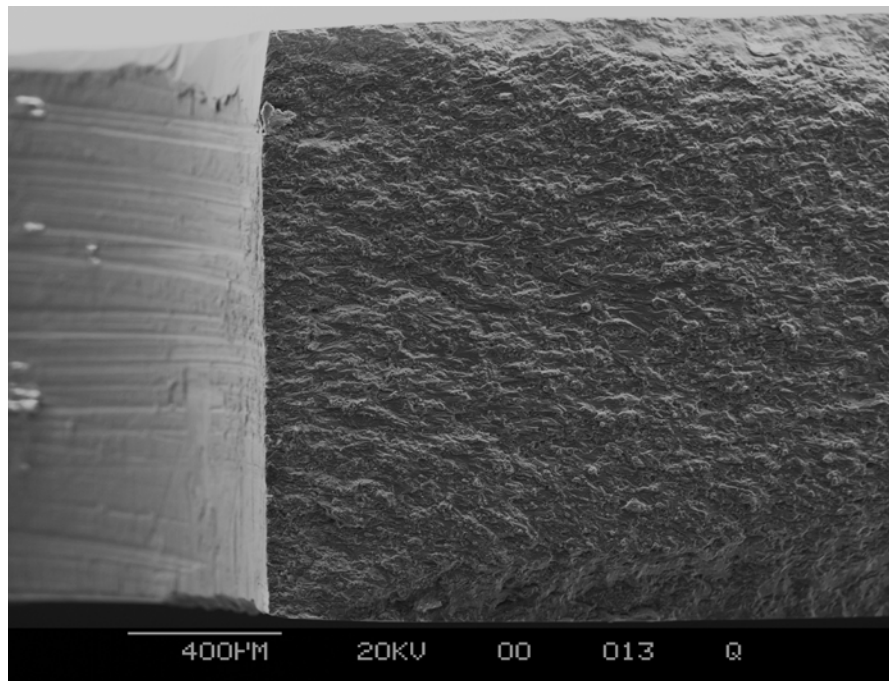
Fracture surface of specimen 12s showing crack initiation area
